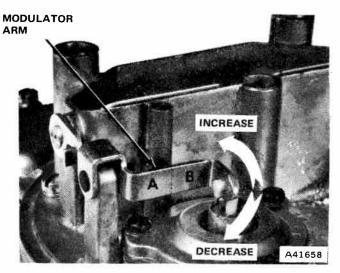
Initial Choke Valve Clearance Adjustment
